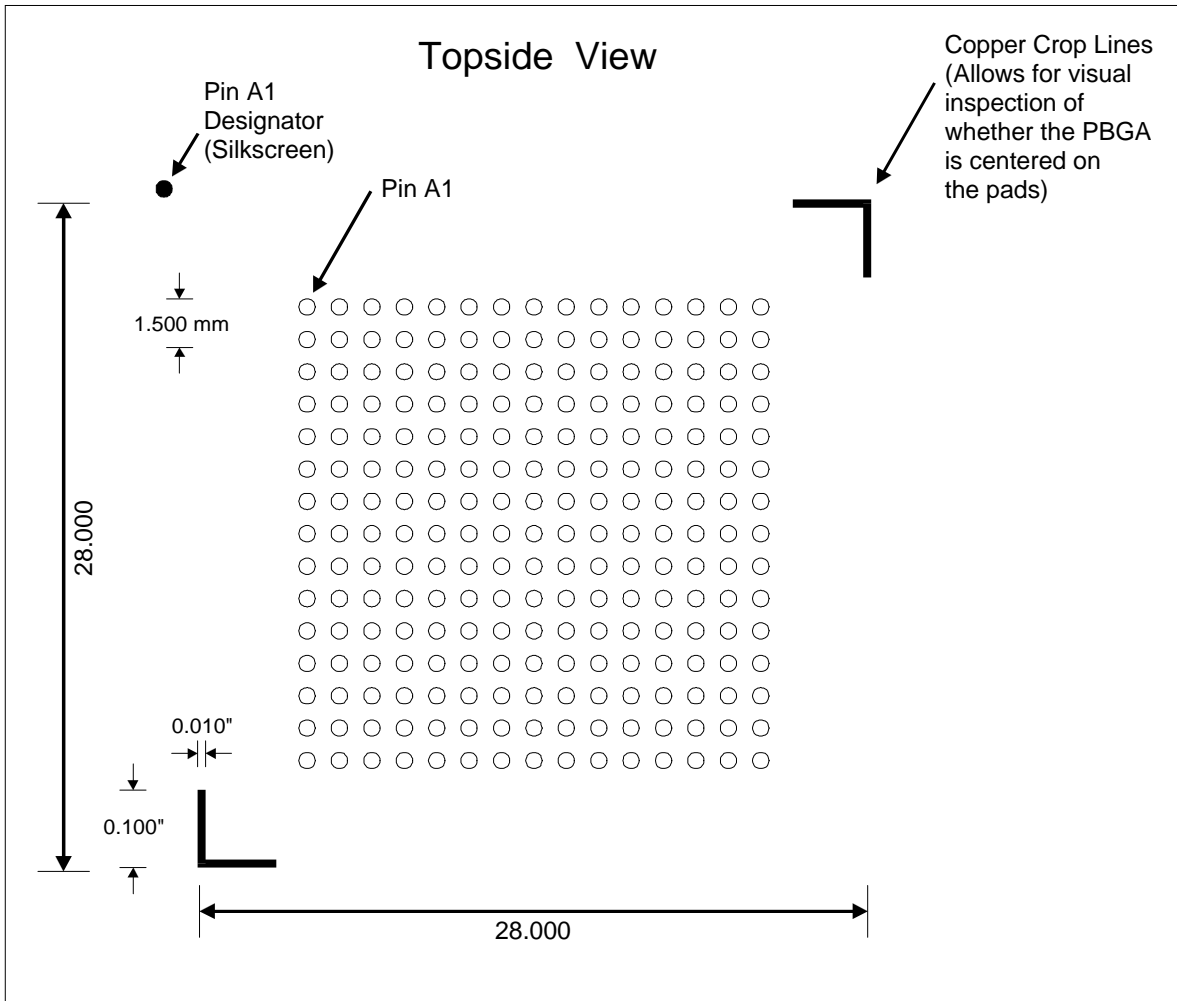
225-Pin PBGA Suggested Land Pattern for PCB Layout
